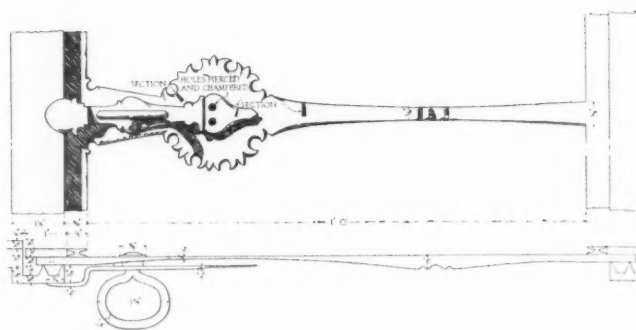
A DRAWING OF THE FITTING ILLUSTRATED BELOW.
